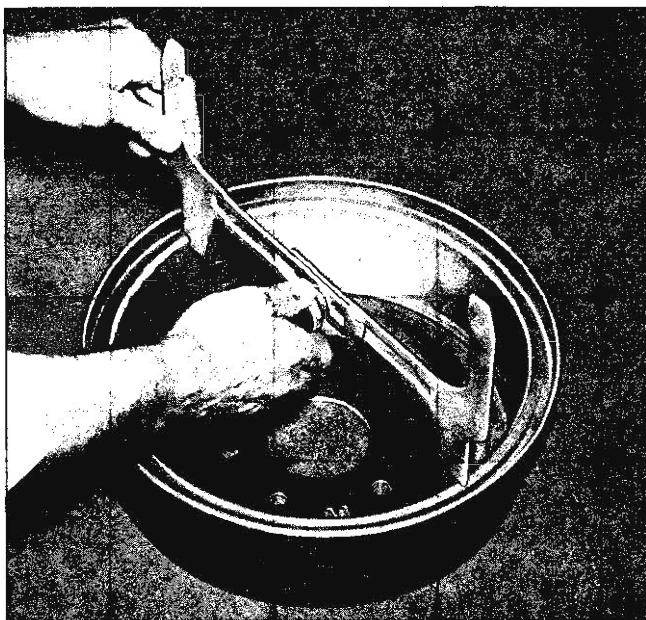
Using Drum-to-Brake Shoe Clearance Gauge
